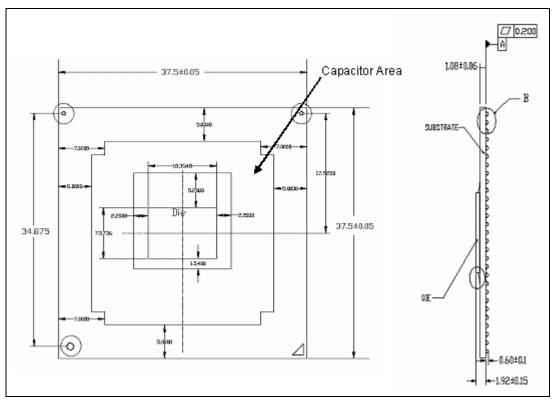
Intel 82854 GMCH micro-FCBGA package dimensions (mm)
